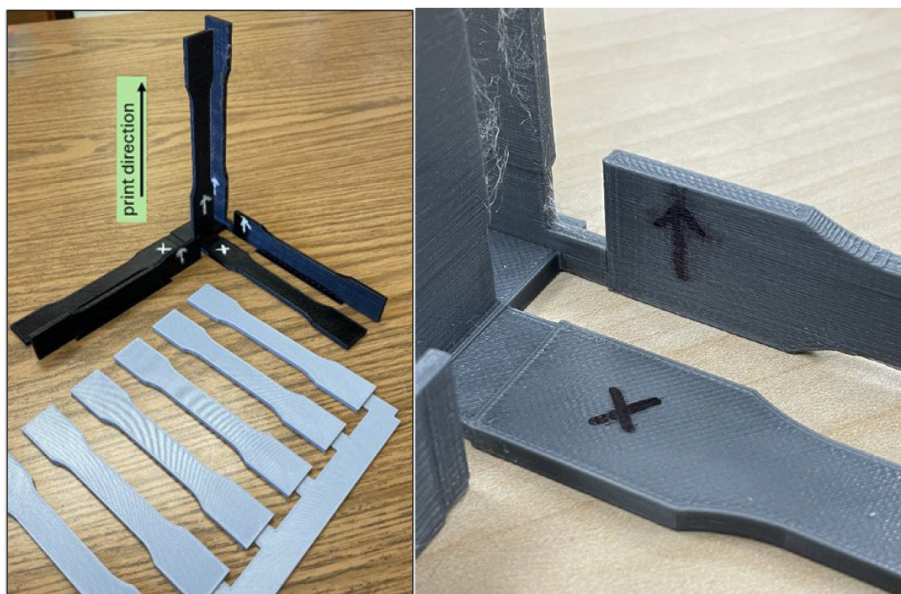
Two print files for tensile specimens used in this study. Parts marked “x” were printed flat to the printing bed. Up arrow on the other specimens indicates the build direction.
